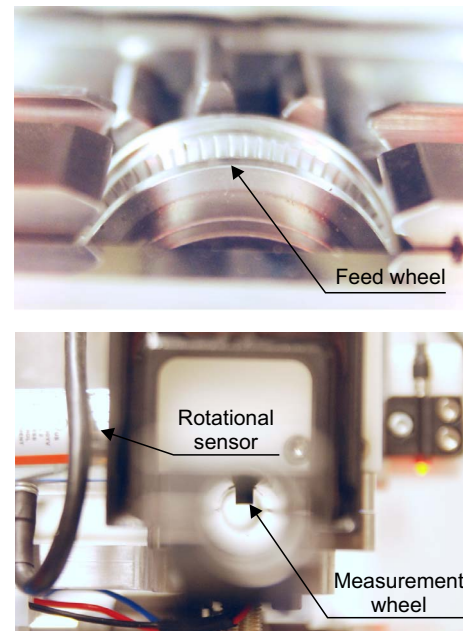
(a) A feed wheel mounted with a cog wheel inside a robot cable feeder tool. (b) The measuring wheel of the miniature cable feed distance measuring system, as seen from the cable guiding system end of a robot cable feeder tool.
